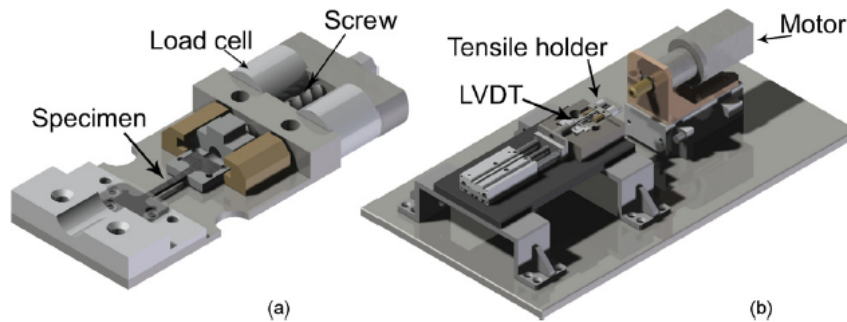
Tensile holder with microtensile specimen (a) and tensile test machine (b).
